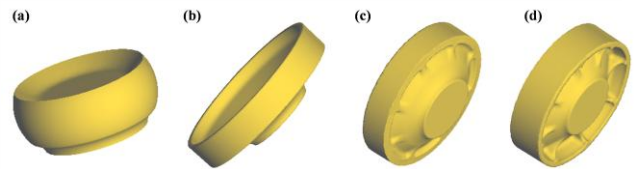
Wheel hub forging process: (a) upsetting stage, (b)pre-forging stage, (c)cavity filling stage, (d)final forging stage
